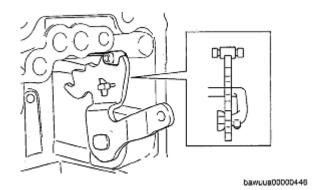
Identifying Detent Spring Bolt Courtesy of MAZDA MOTORS CORP.
